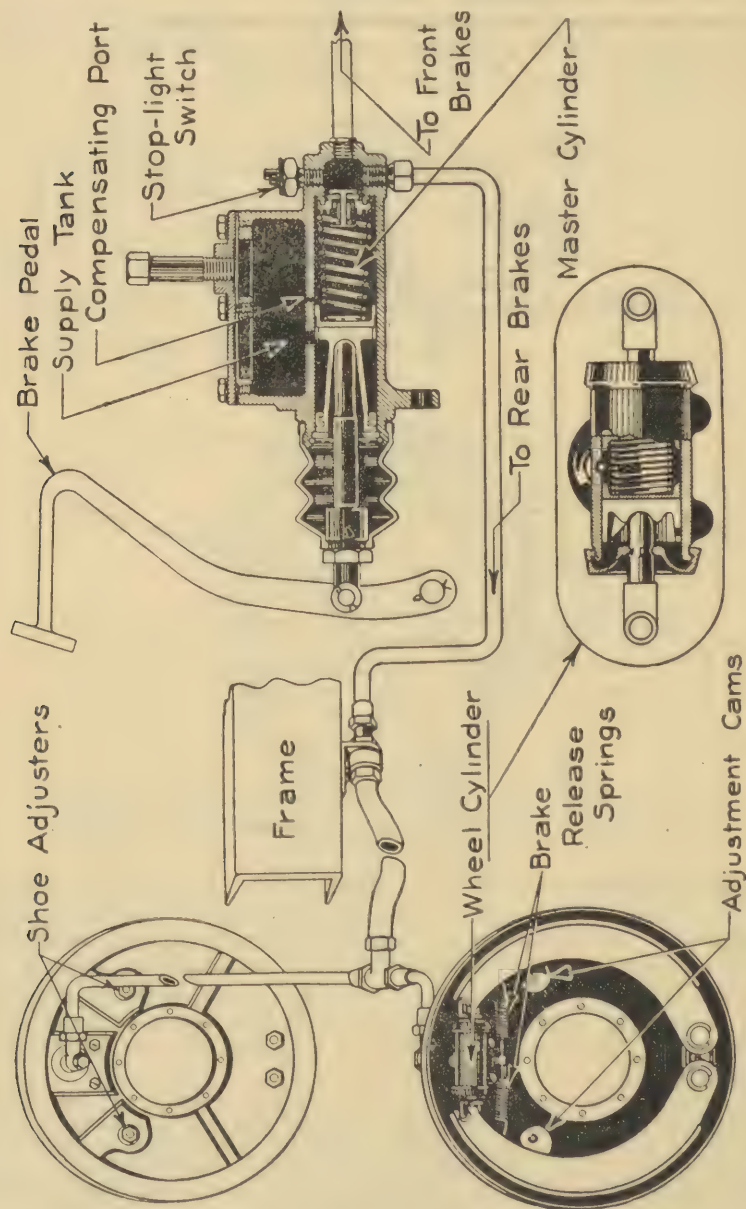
Lockheed Hydraulic Brake System, (Bragg-Kiesrath).
